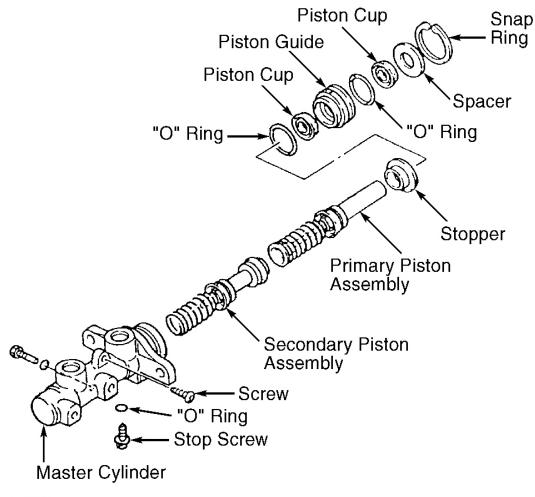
Exploded View Of Master Cylinder (Millenia) Courtesy of MAZDA MOTORS CORP.
